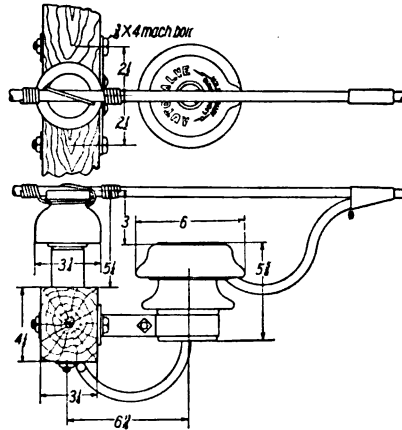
SIDE AND TOP VIEWS OF 2500-VOLT ARRESTER WITH FORM H MOUNTING BRACKET
